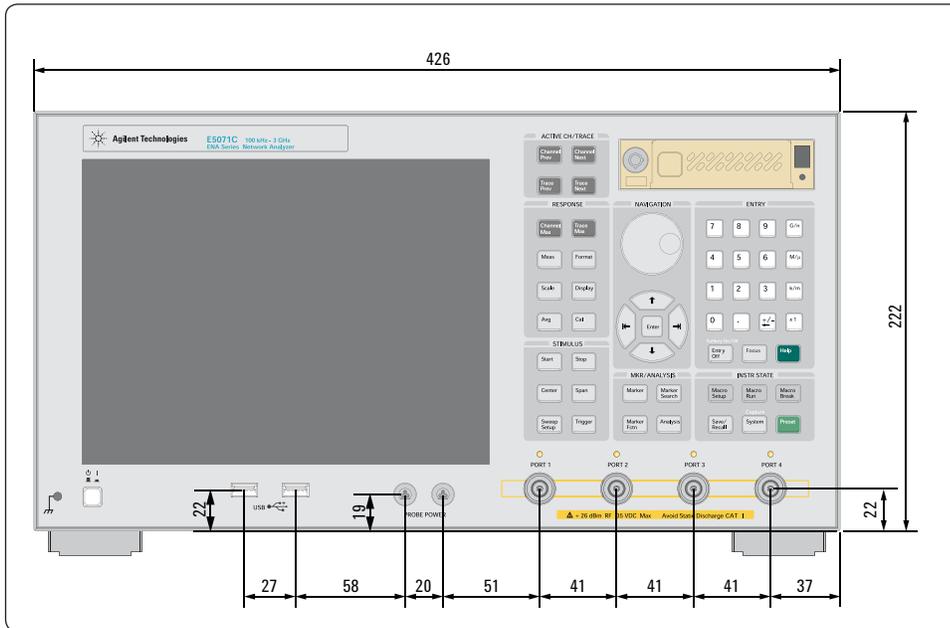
Dimensions (front view, E5071C with Option 430/435/440/445/460/465/480/485, in millimeters)
